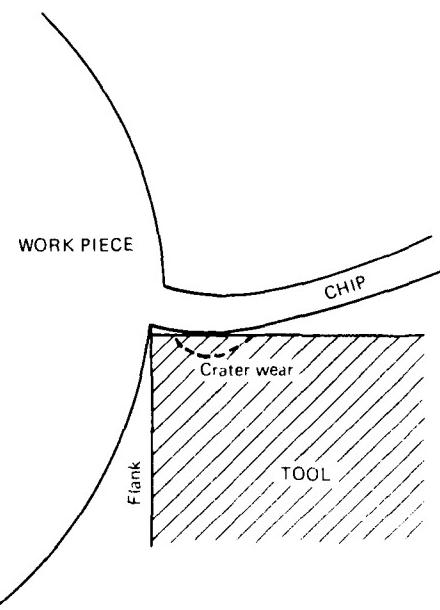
Schematic diagram of machining showing the wear phenomena on the flank and rake faces of the cutting tool.
